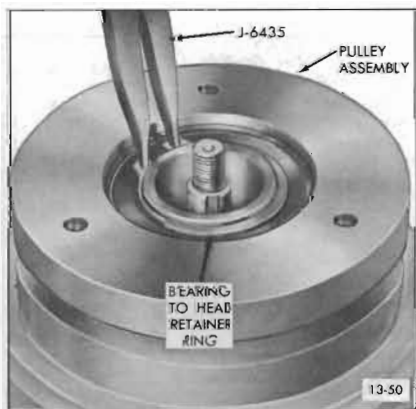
Removing or Installing Bearing to Head Retainer Ring
